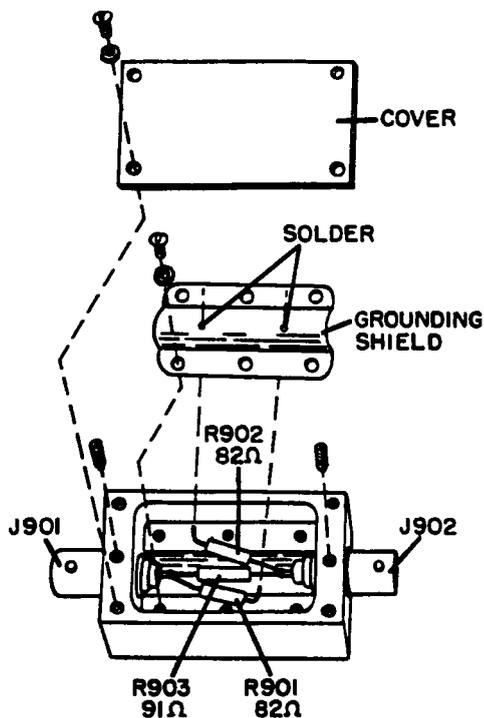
Attenuator, Fixed CN-287/TRM-1 (12 db), Exploded View
